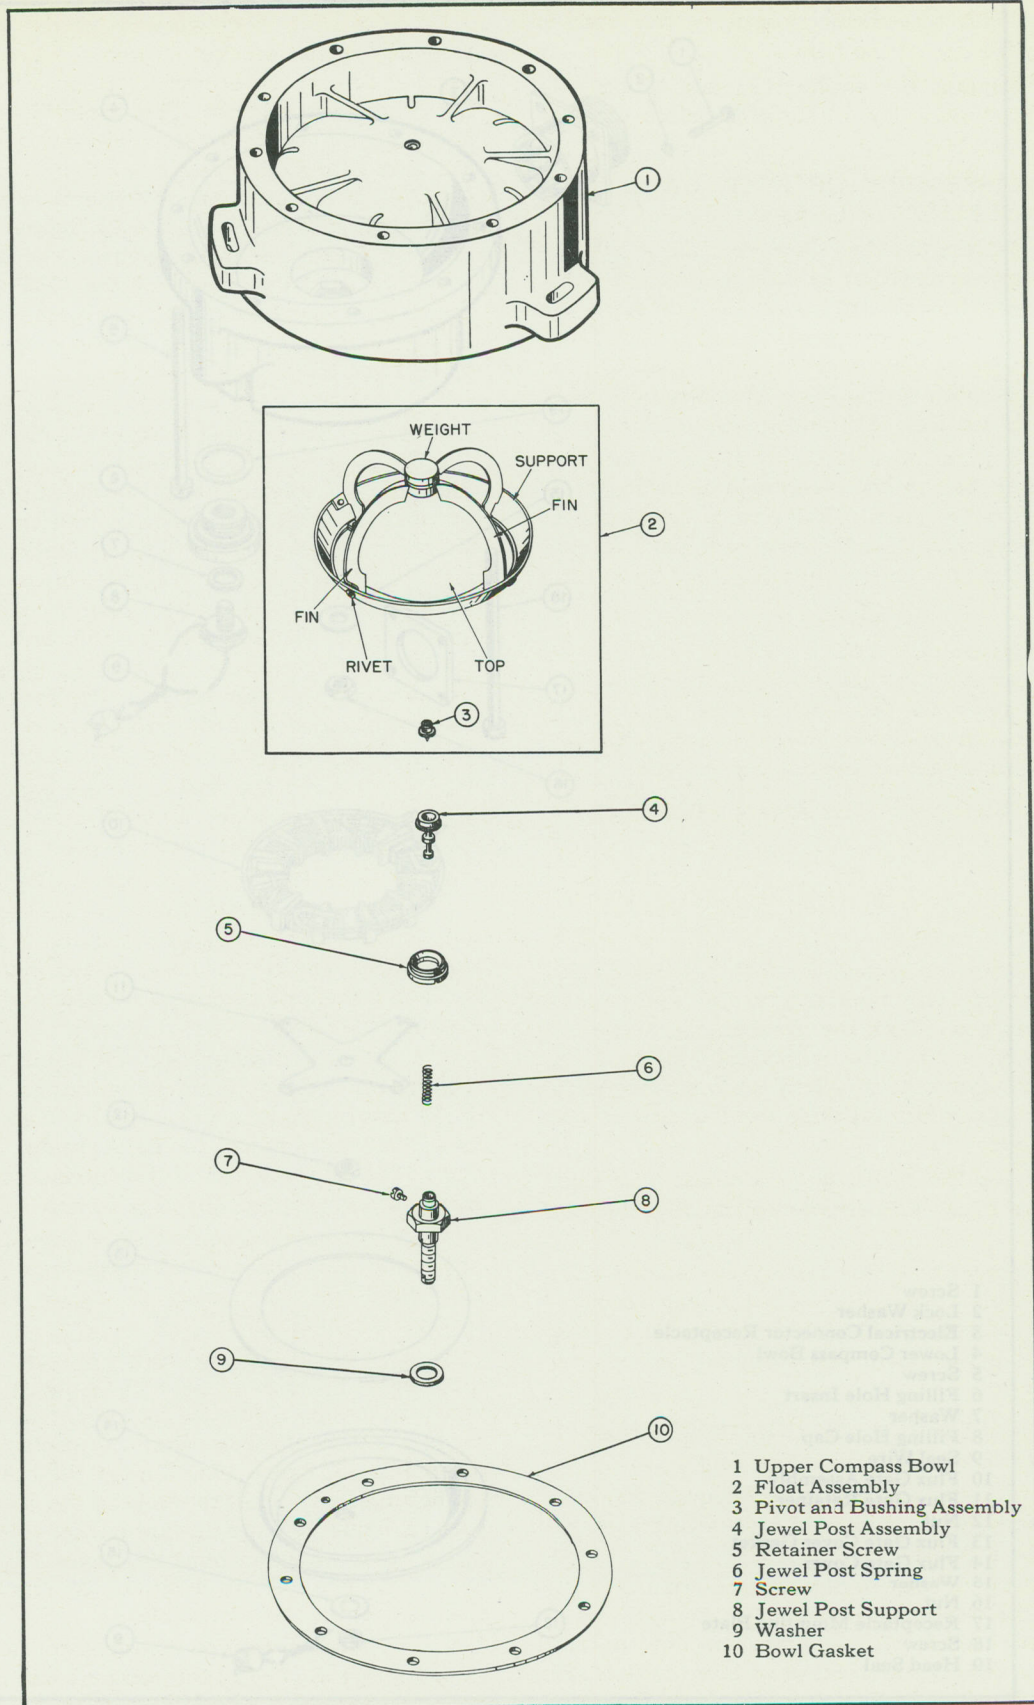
Exploded View Drawing—Main Assembly—Transmitter—Type AN 5730-3
